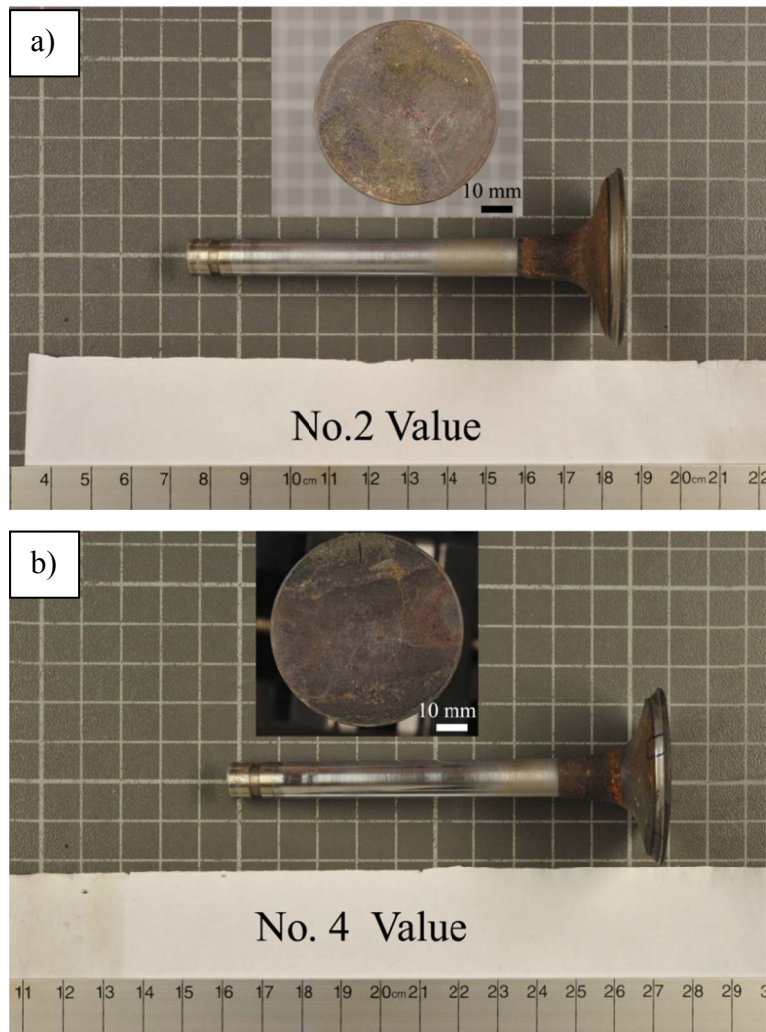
Photograph of failed exhaust valves, inside with corresponded head
